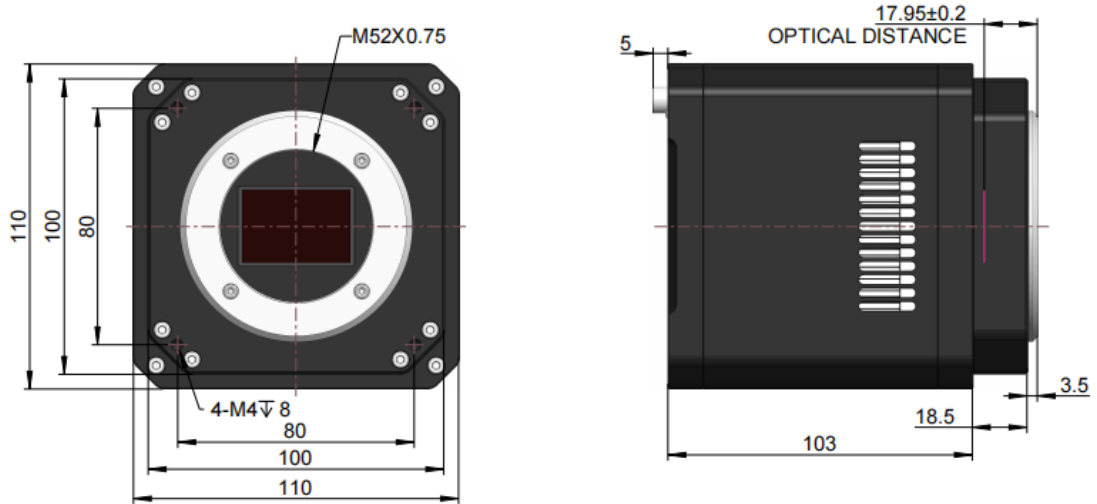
MaxCam-455M/C-TE& MaxCam-410C-TR dimensions (mm)
